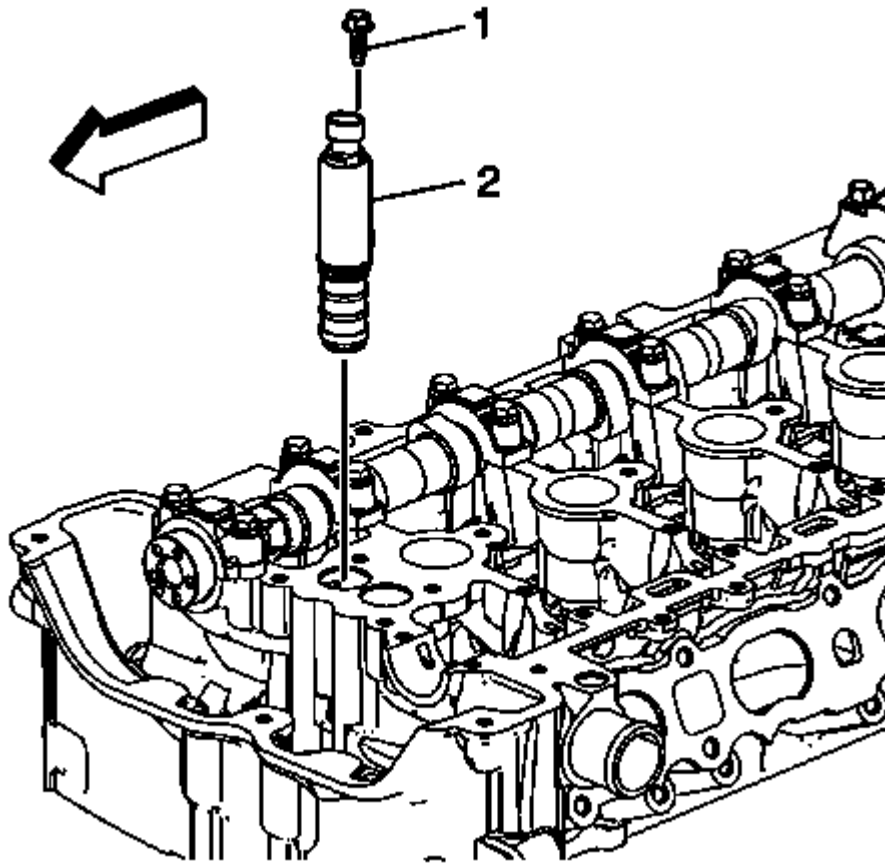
Exhaust Camshaft Position Actuator Solenoid Valve & Bolt
